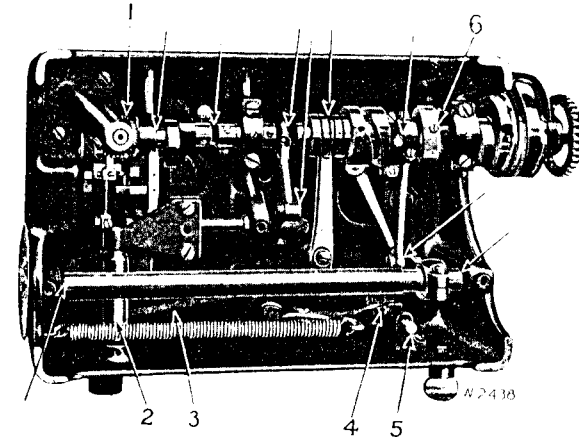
OILING POINTS IN THE BASE OF THE MACHINE
